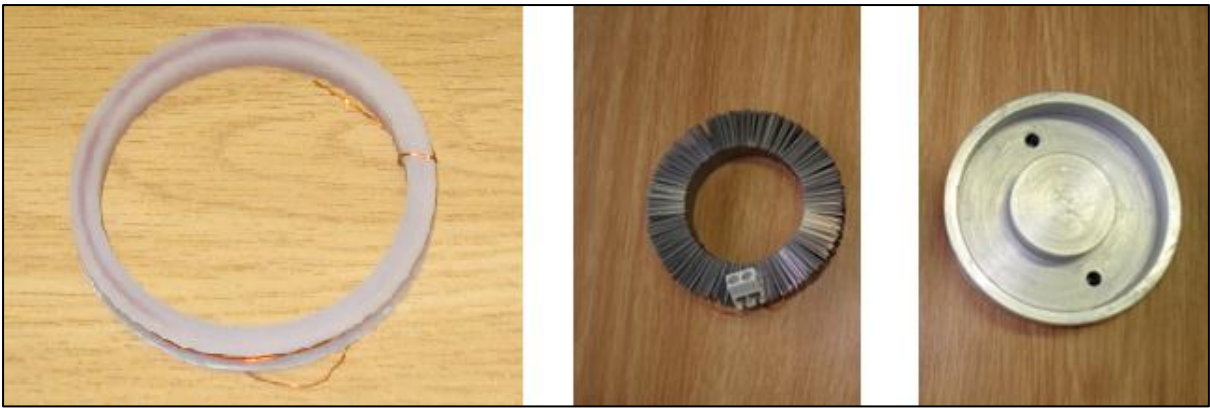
shows the modified transformer laminations and inner nylon wound core assembly progress. The idea was to surround the entire nylon core with the C-shaped laminations while ensuring the entire internal assembly could still fit within the machined aluminium cast. The assembly would be cast solid in a similar polymer compound utilised earlier.
